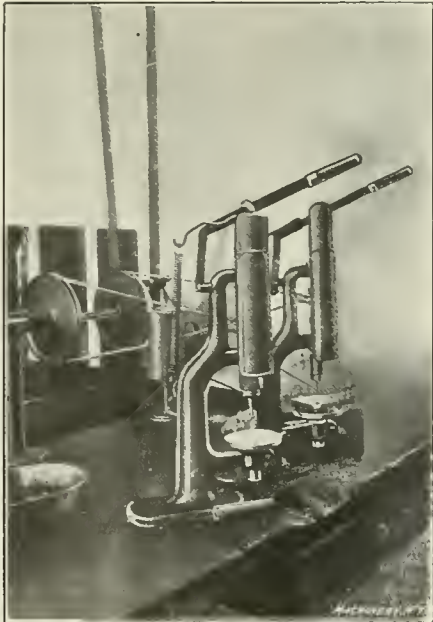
Bench Drills for Drilling Holes in Eccentric
